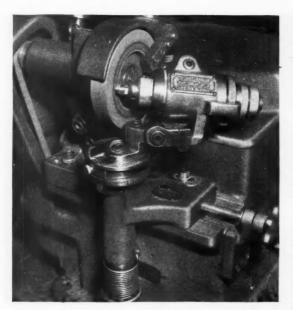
A single-point carbide tool can quickly be lapped to exact specifications in the Heald Tool Lapping Machine. It is only necessary to make a few simple adjustments and flick a switch, and the tool is correctly lapped, automatically.
